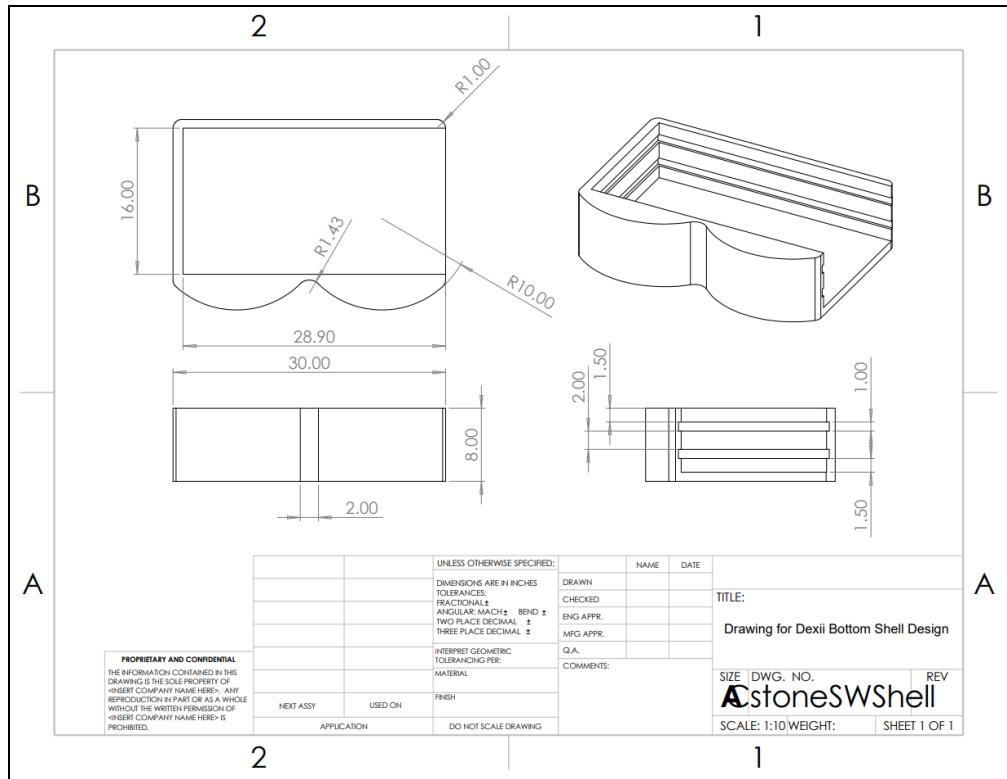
, SolidWorks drawing of the bottom shell (Team 3, 2024)
